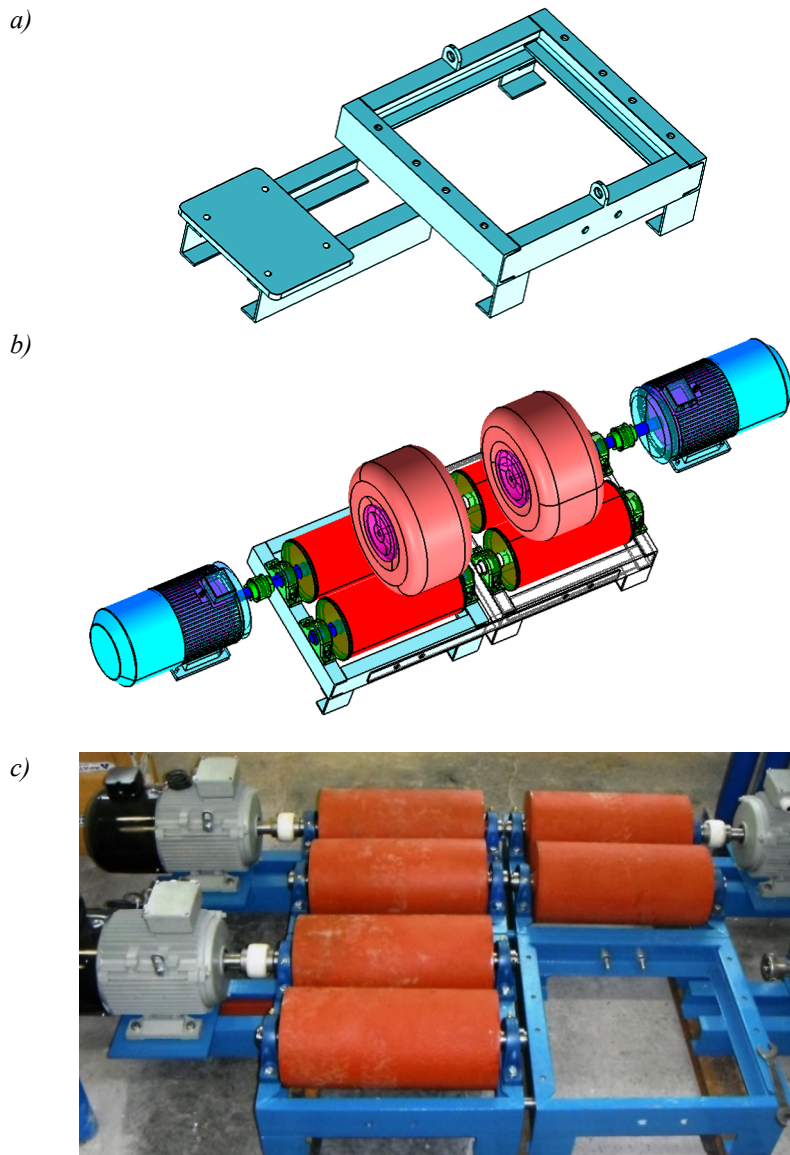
Elements of the stand a) frame of one module of dyno with electric engine mounting base, b) dyno module for one axle testing – visualization of project, c) dyno assembly
